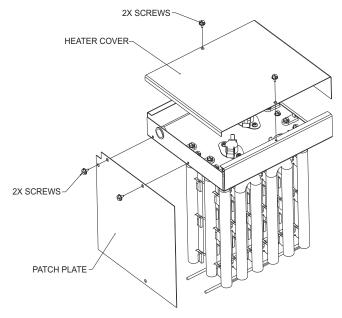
HEATER/TOP PLATE ASSEMBLY
